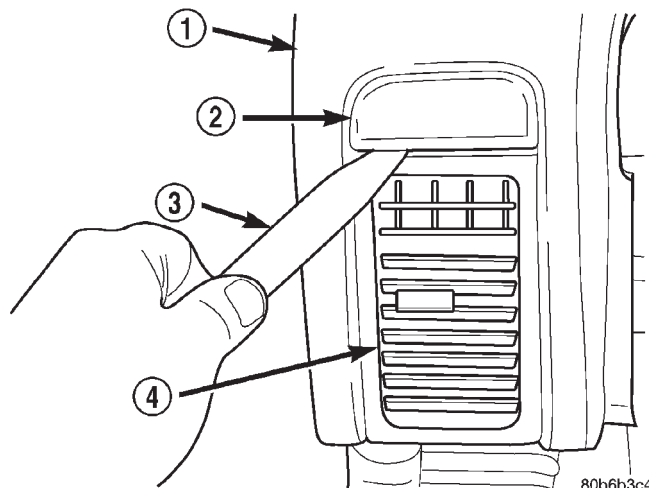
Instrument Panel Driver Side Trim Bezel Remove/Install
